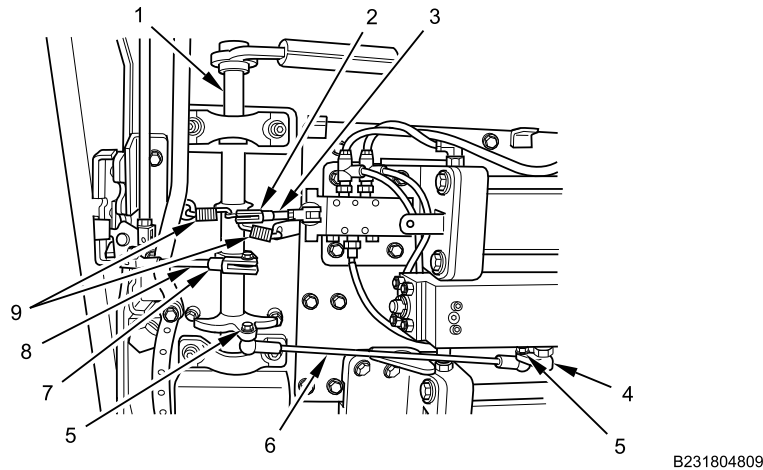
Retaining Clips, Springs, and Door Linkage Rods Removal.
